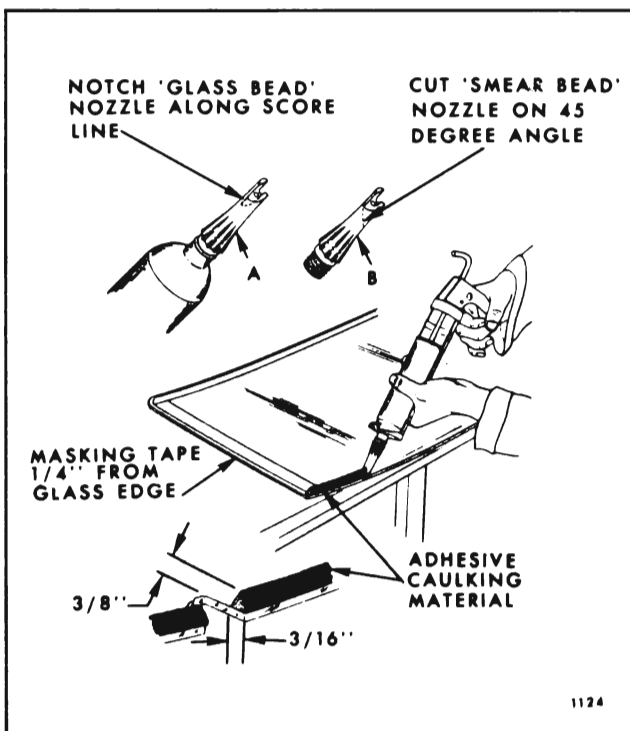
Adhesive Caulking Installation - Extended Method
